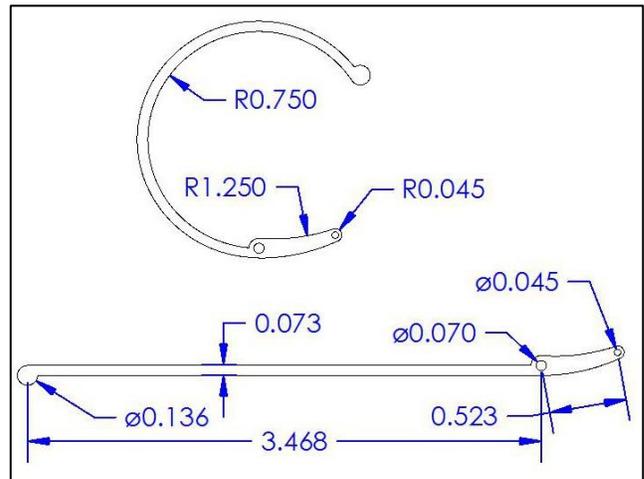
Construction drawing for the barrel click spring. The spring is cut from 1/16" tool steel according to the dimensions of the lower drawing and then bent to the shape of the upper drawing.
